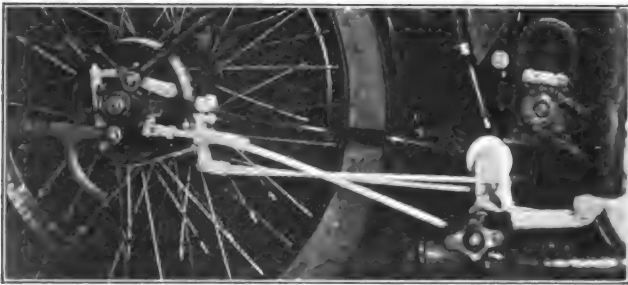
A side view of low gear position. Note that the high gear pedal is in the same position as in free engine (Figs. 3 and 4) and that the cone is in. Low gear is obtained by holding the axle stationary when hub is in free engine position. This is accomplished by pushing down on the low gear pedal of the combination lever and holding it, thus clamping the drum which is keyed to the axle.
